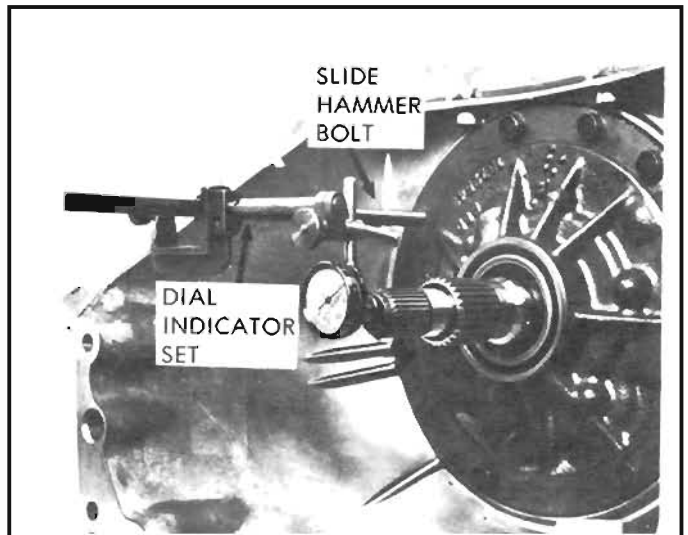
Checking End Play Output Shaft Sleeve and "O" Ring
